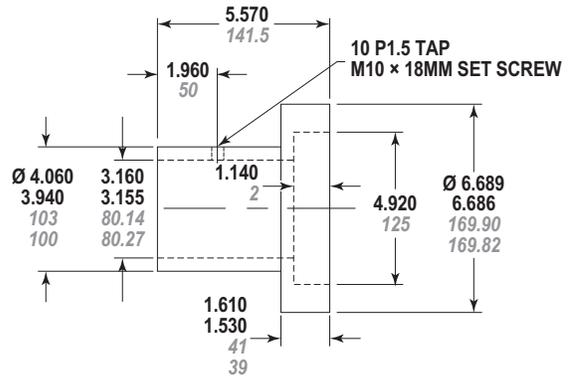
LIP SEAL INSTALLATION TOOL
